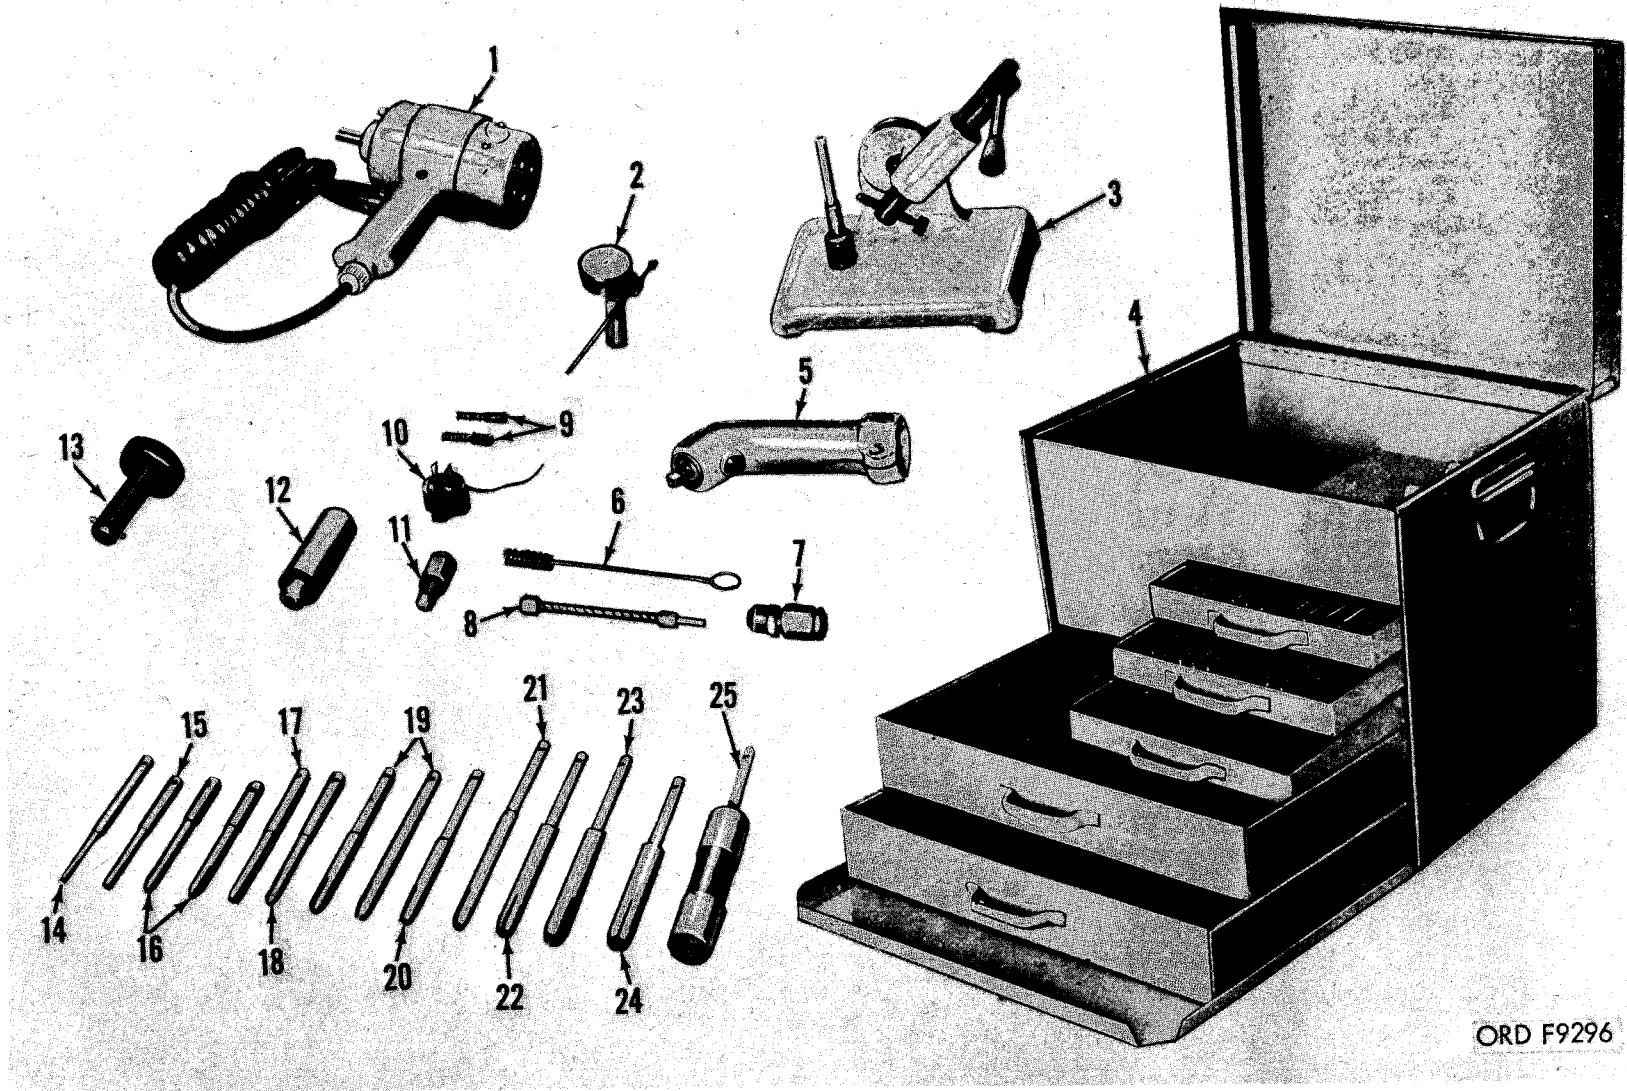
Grinding kit w/equipment and repair parts (for 35472: model P300BB-M2).
